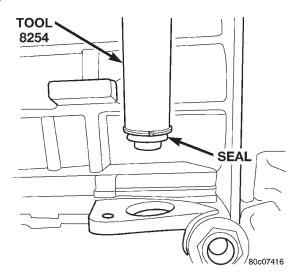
Install Dipstick Tube Seal Using Tool 8254
